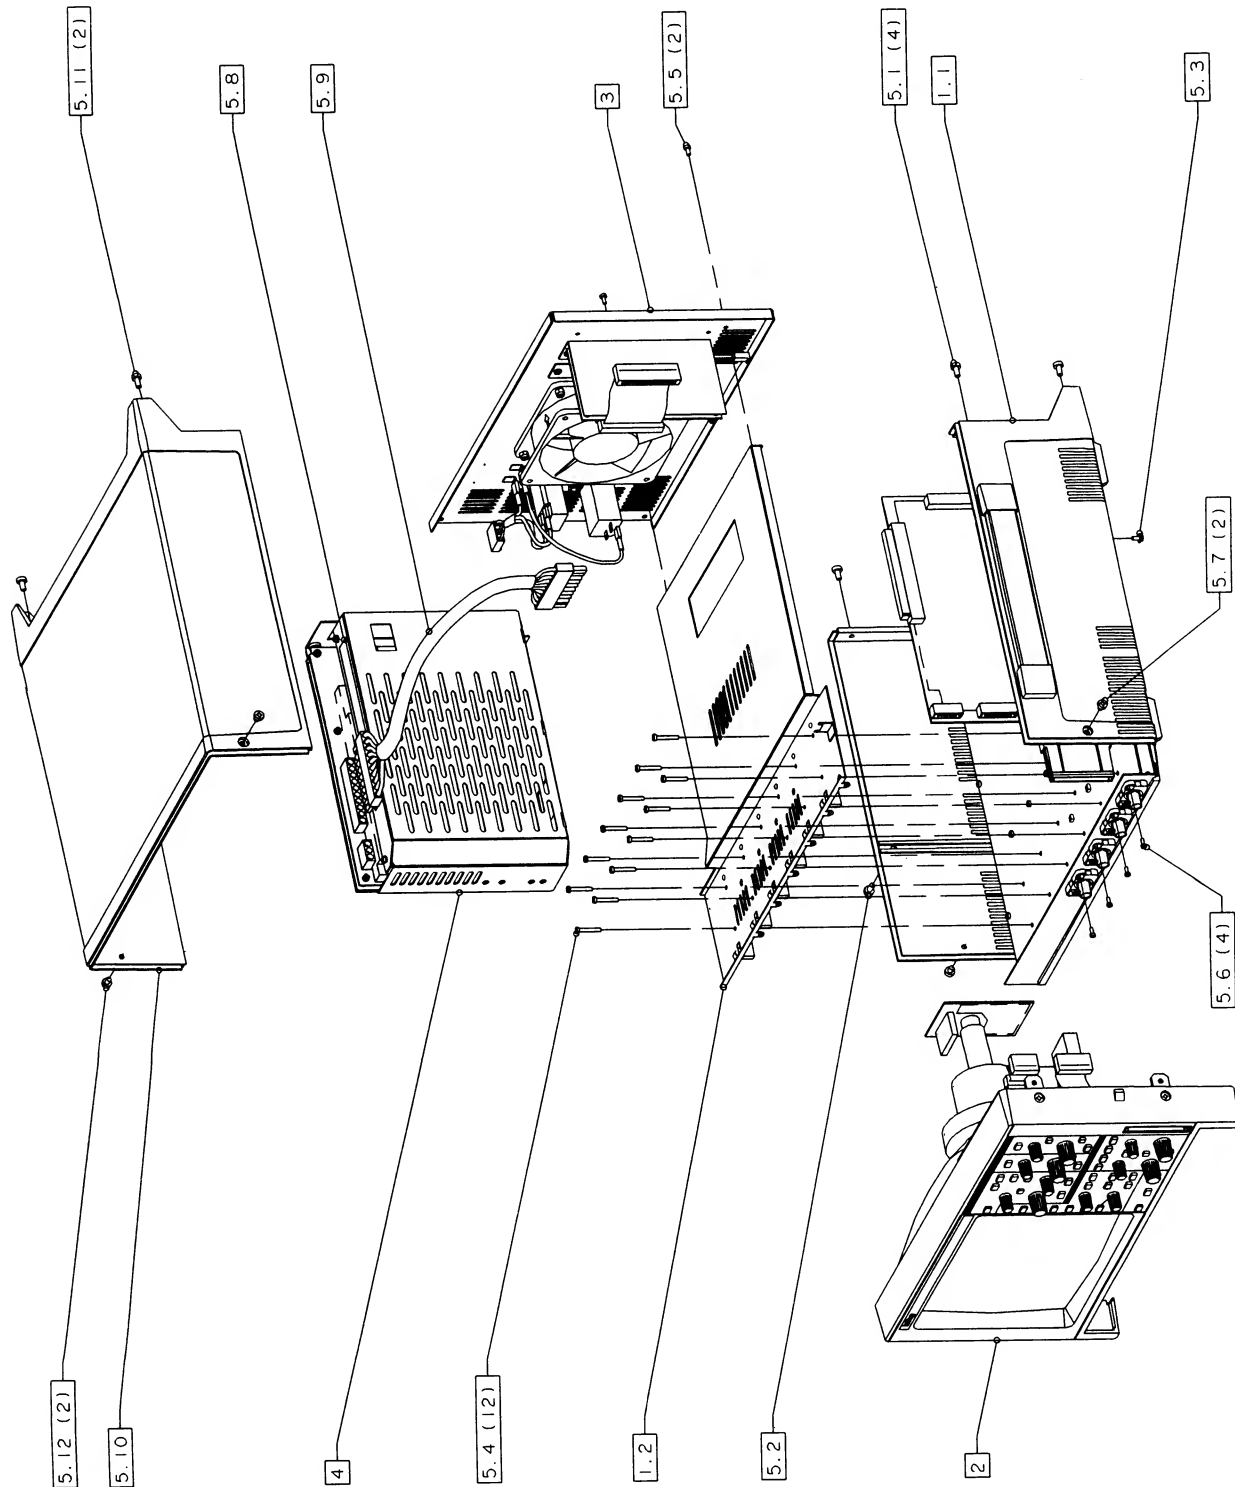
9320 DSO EXPLODED VIEW
